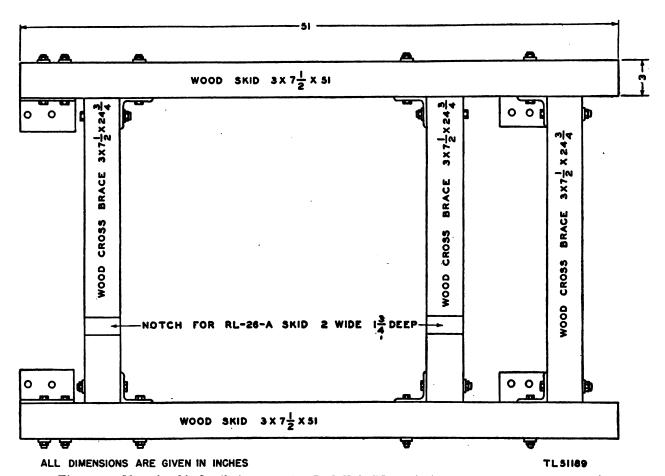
Mounting kit details for mounting Reel Unit RL-26-() on 4-ton 4x4 weapons carrier.
